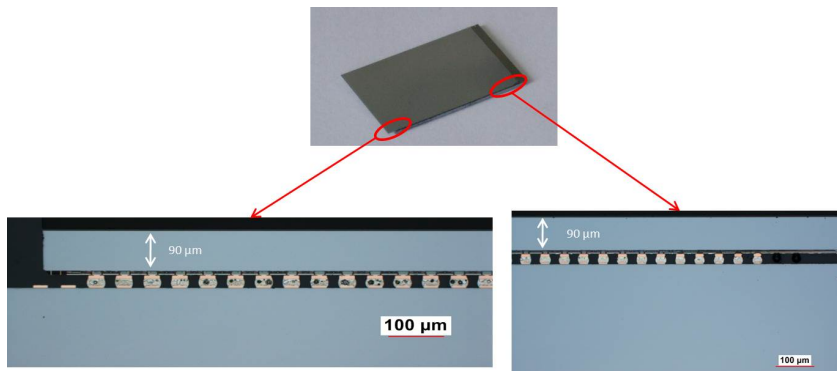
Cross-section of a prototype module built using the polyimide method. The FE chip consists of a 2×2 array of FE-I2 chips. The zoom-in onto top and bottom bump bonds along the first column shows that bump connection is achieved along the entire chip perimeter (courtesy of IZM).
